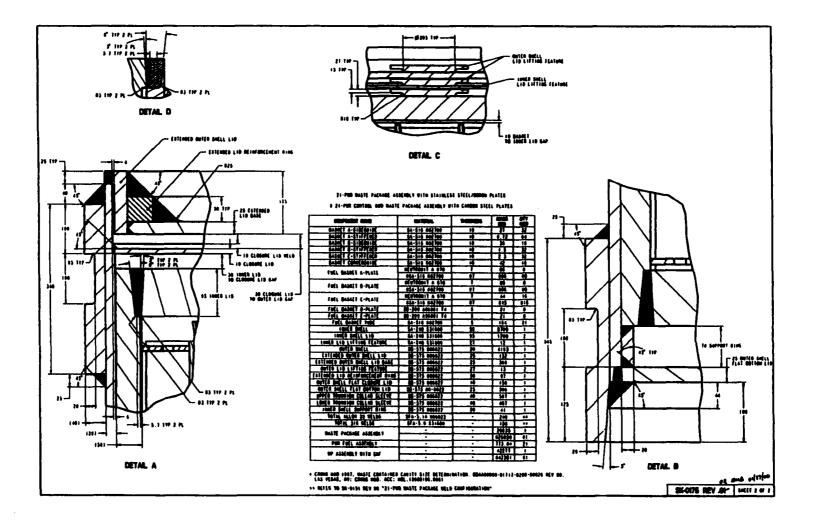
Spent Nuclear Fuel Canister Design Sketch (Closure-Weld Section)
